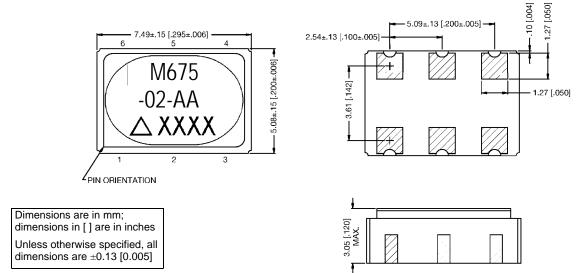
Device Package - 5 x 7.5mm SMT (Surface Mount) Package
